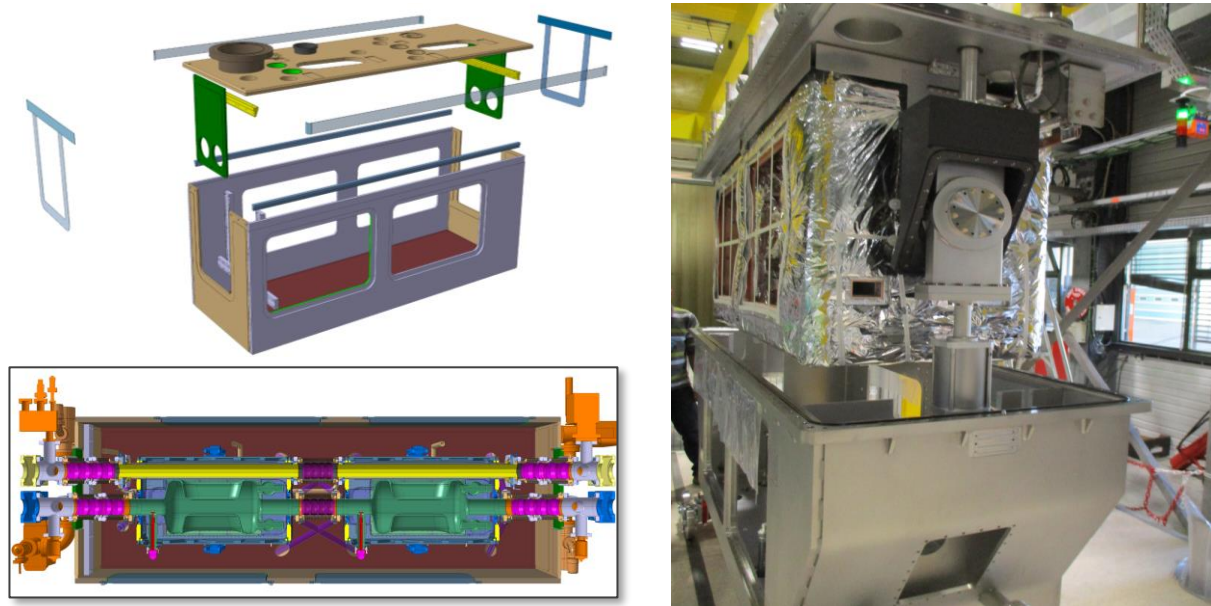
The design of the vacuum vessel for the HL-LHC using a welded design including the provision for the adjacent beam pipe (left top); Cross-sectional view of the cryomodule including the vacuum interfaces and cold-to-warm transitions (left bottom); Assembly concept of the SPS-DQW dressed cavity string on the top plate of the vacuum vessel (right).
